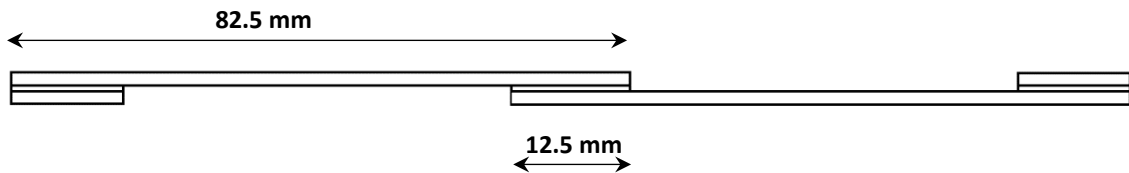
Dimensions of the single lap joints used in this study. Width=25mm.
